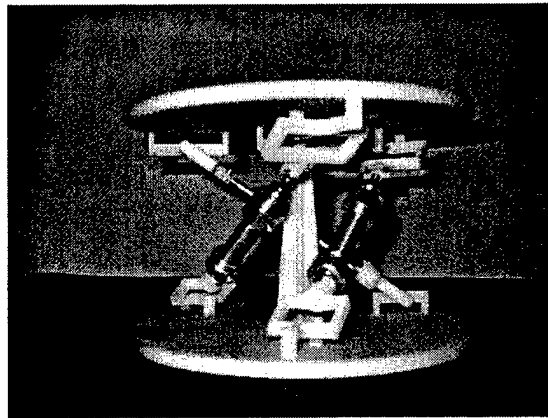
A deposition table constructed using the Compliant Parallel Machine Design Methodology
